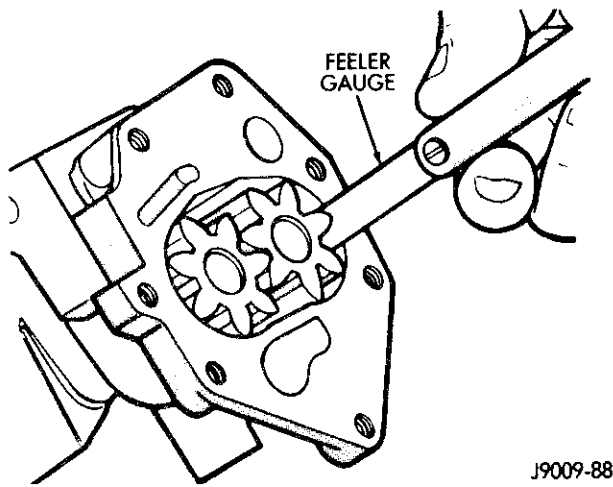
Oil Pump Gear End Clearance Measurement — Feeler Gauge Method
